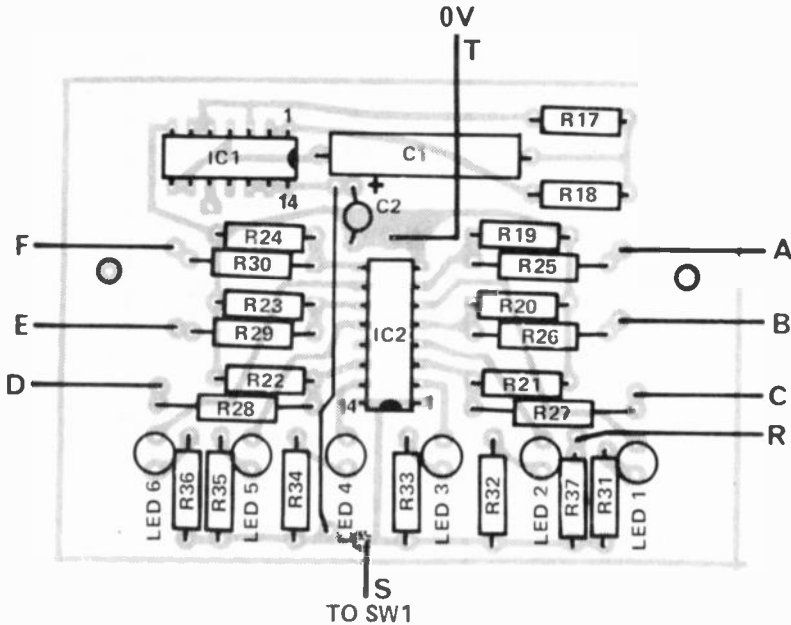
Component overlay for board ETI-123a. Note that C1 may need to be mounted on reverse side, and that the LEDs should be mounted as detailed in the text.
